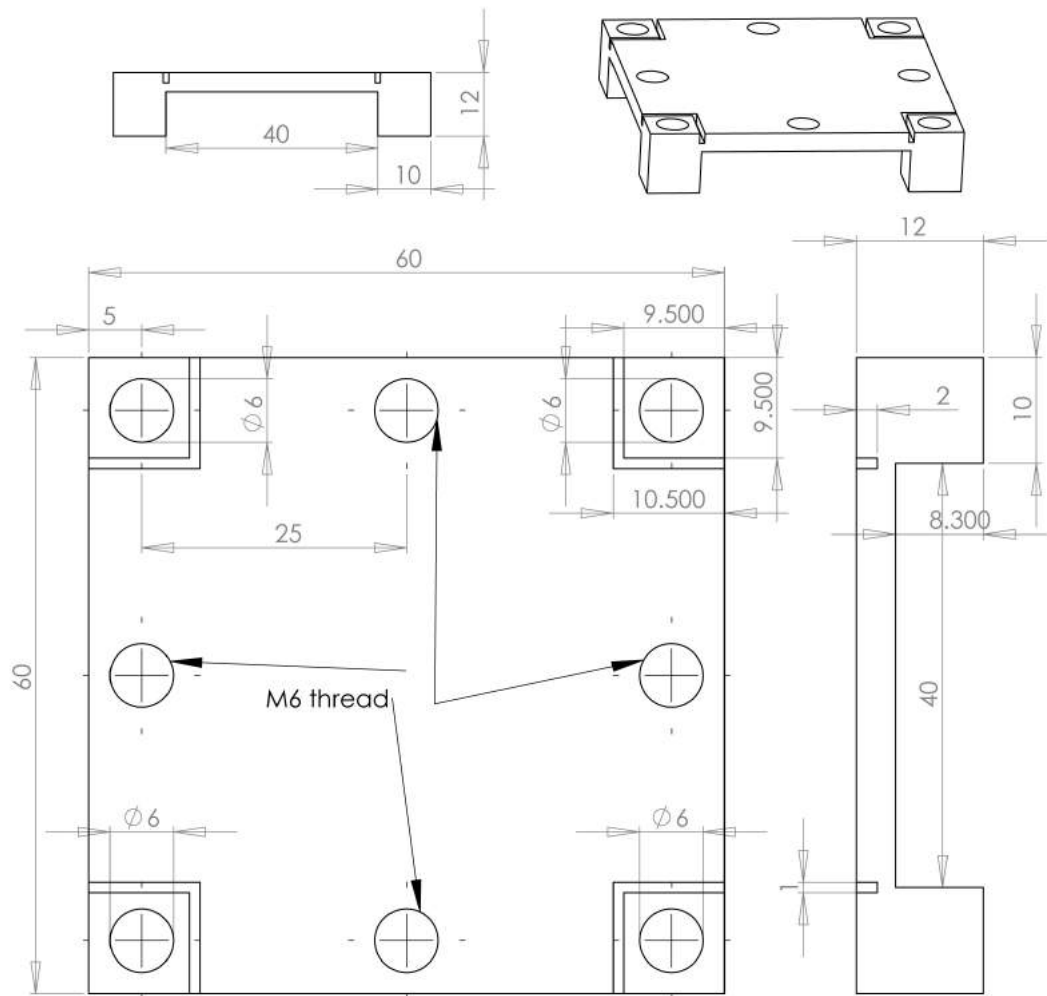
The heating plate shown in Figure 4.15 of Chapter 4 which fits on top of the alignment stages shown in Figure 4.14. This heating plate was designed in conjunction with Dr Bjoern Lekitsch. The workshop altered this design for easier machining of the thermal isolation at the corners of the plate which can be seen in the previously mentioned figure. The threaded holes are in order to attach a small jig to hold the magnetic spacer in place during the alignment procedure. Though not shown on this drawing, two additional threaded holes were machined for mounting the DBK HP05-1/14-24 heating element of the plate.
